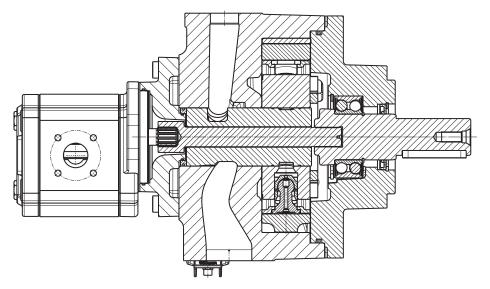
Radial piston pump with tandem mounted gear pump using SAE-B adapter
